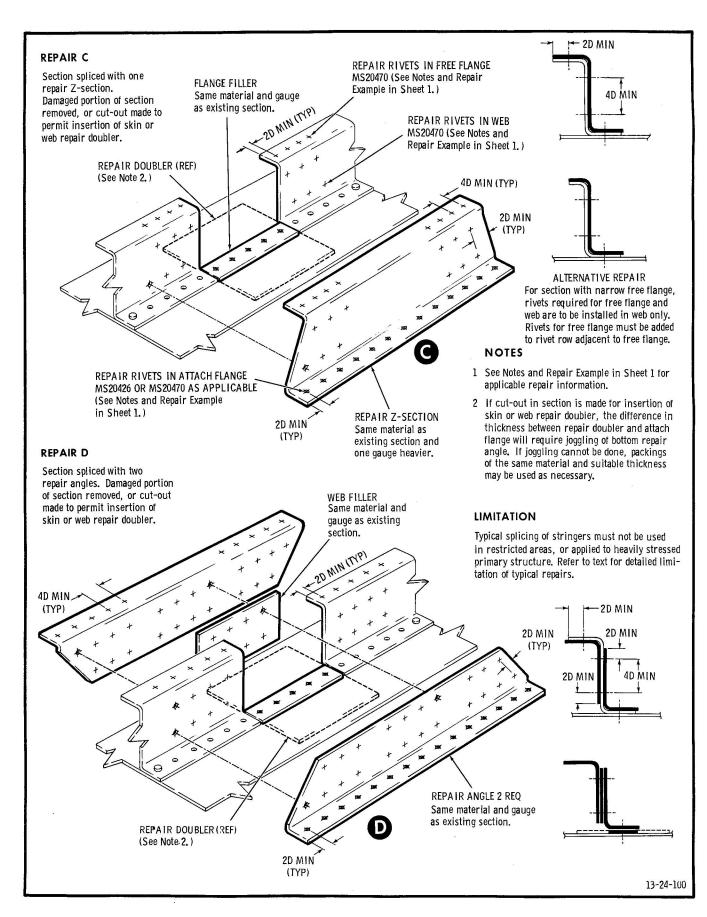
(Sheet 2 of 2) Formed Section Splice - Cut-out Repair
